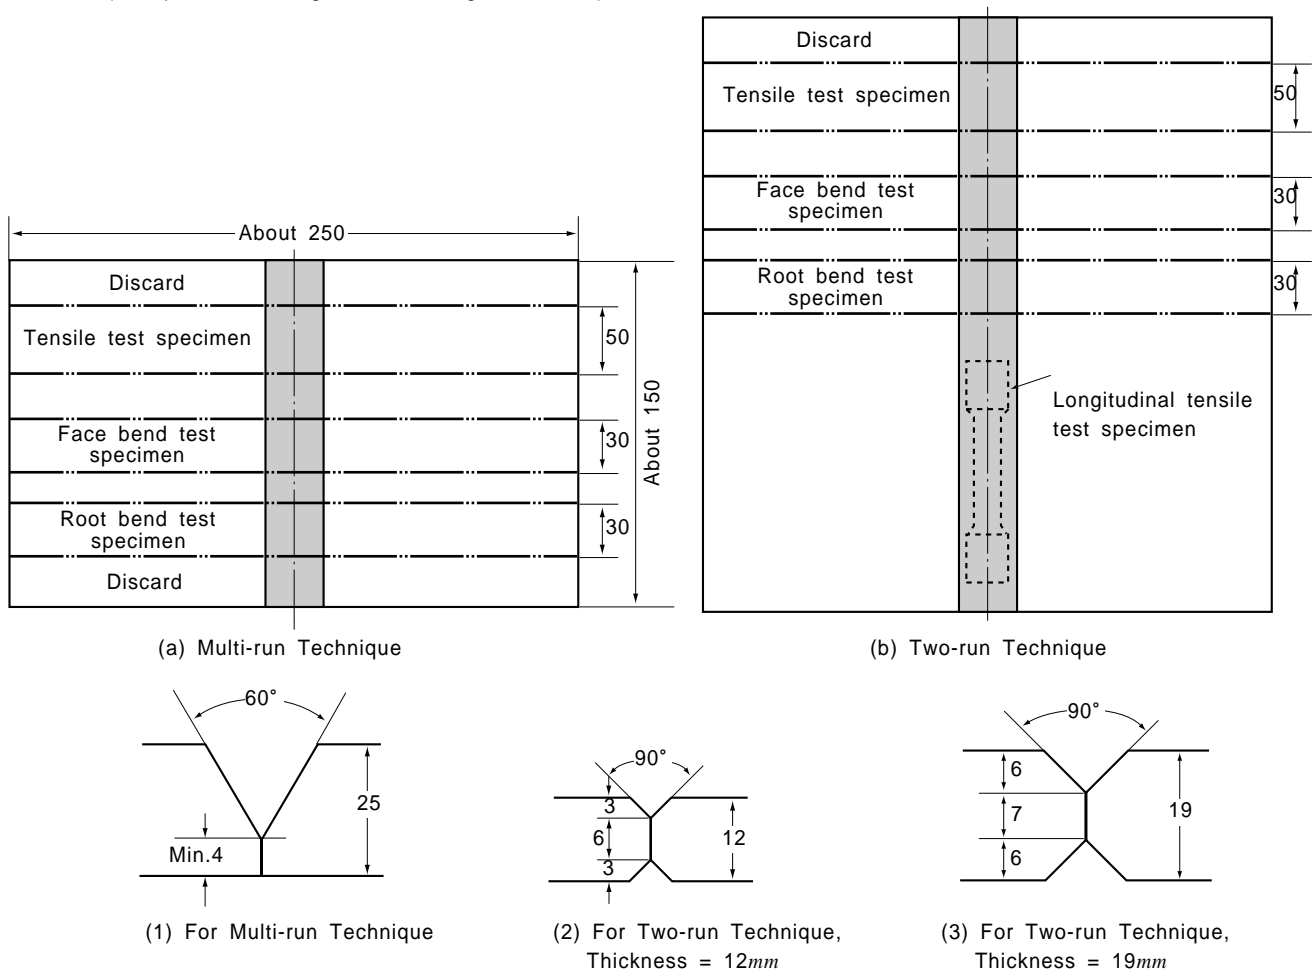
Butt Weld Test Assembly for Stainless Steel (Submerged arc welding, Unit : mm)
